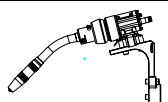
Mounting the torch gauge (for 31° curved torch)
